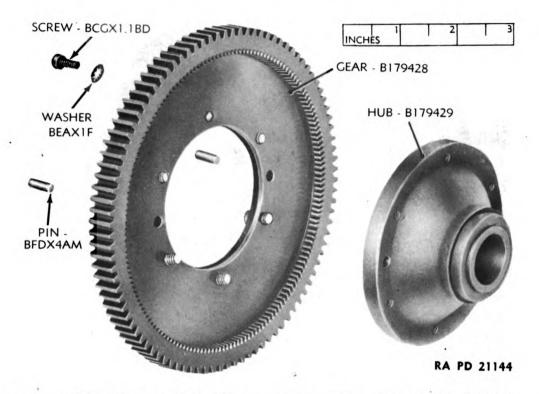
Disassembly of Gear—Output Clutch Assembly C82053
